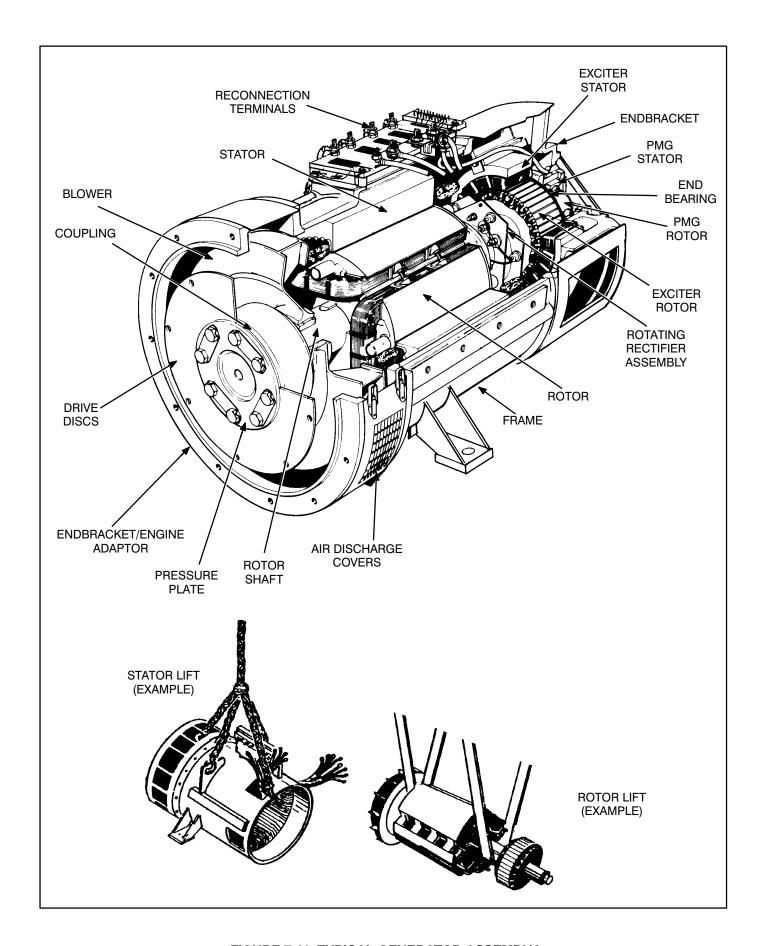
TYPICAL GENERATOR ASSEMBLY
